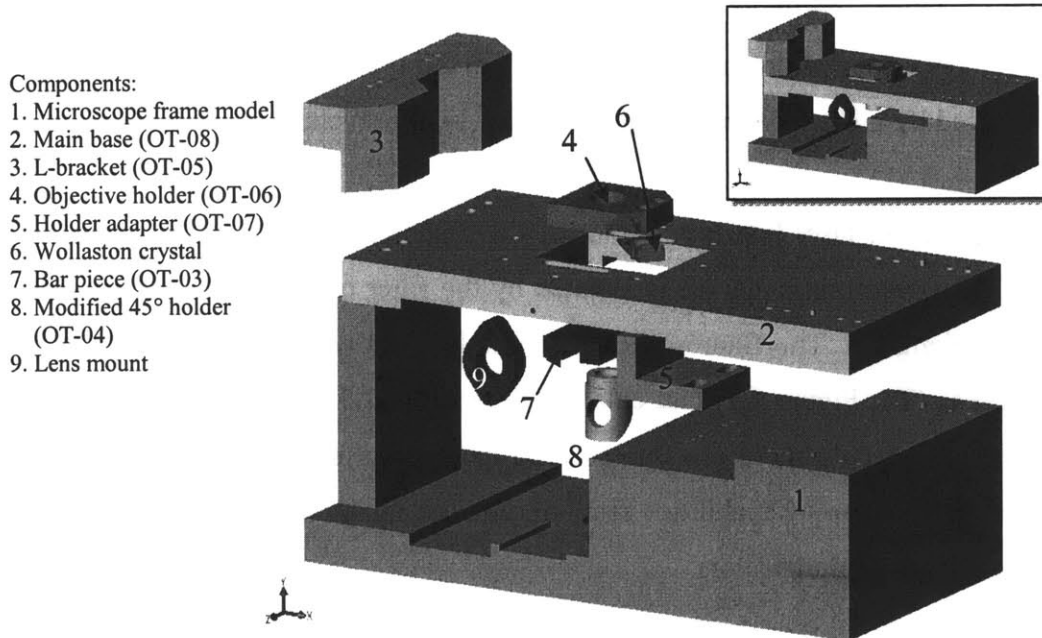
Microscope modifications (exploded view). *Inset:* Assembly view.
